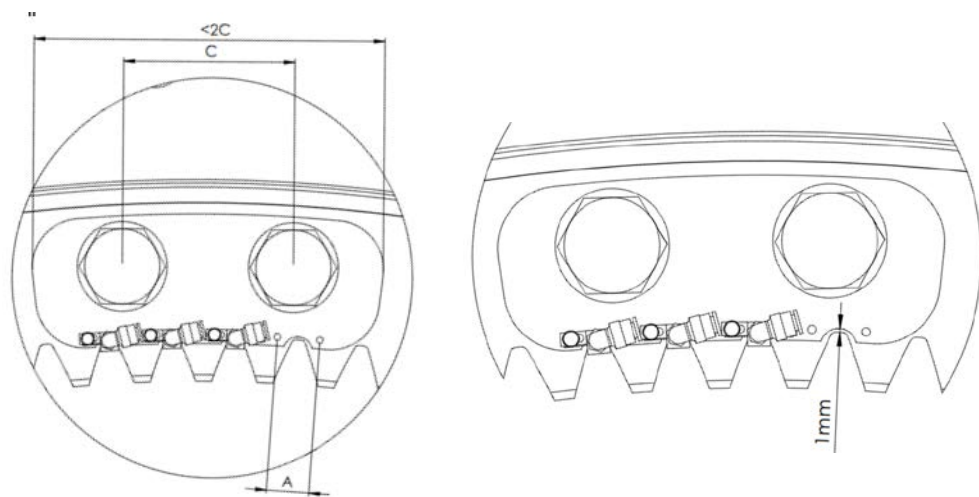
Details of the plate needed for the MiCRoLuBGear assembly
